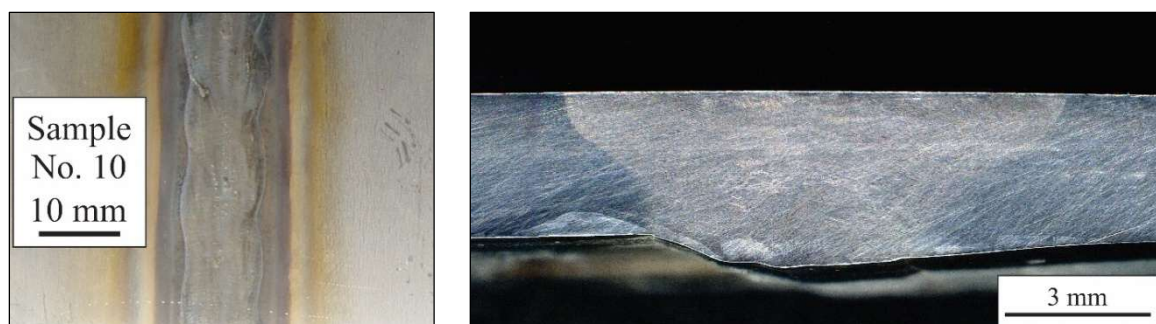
Specimen N° 10 - TAG, 210 A, filler wire 120 cm/min
